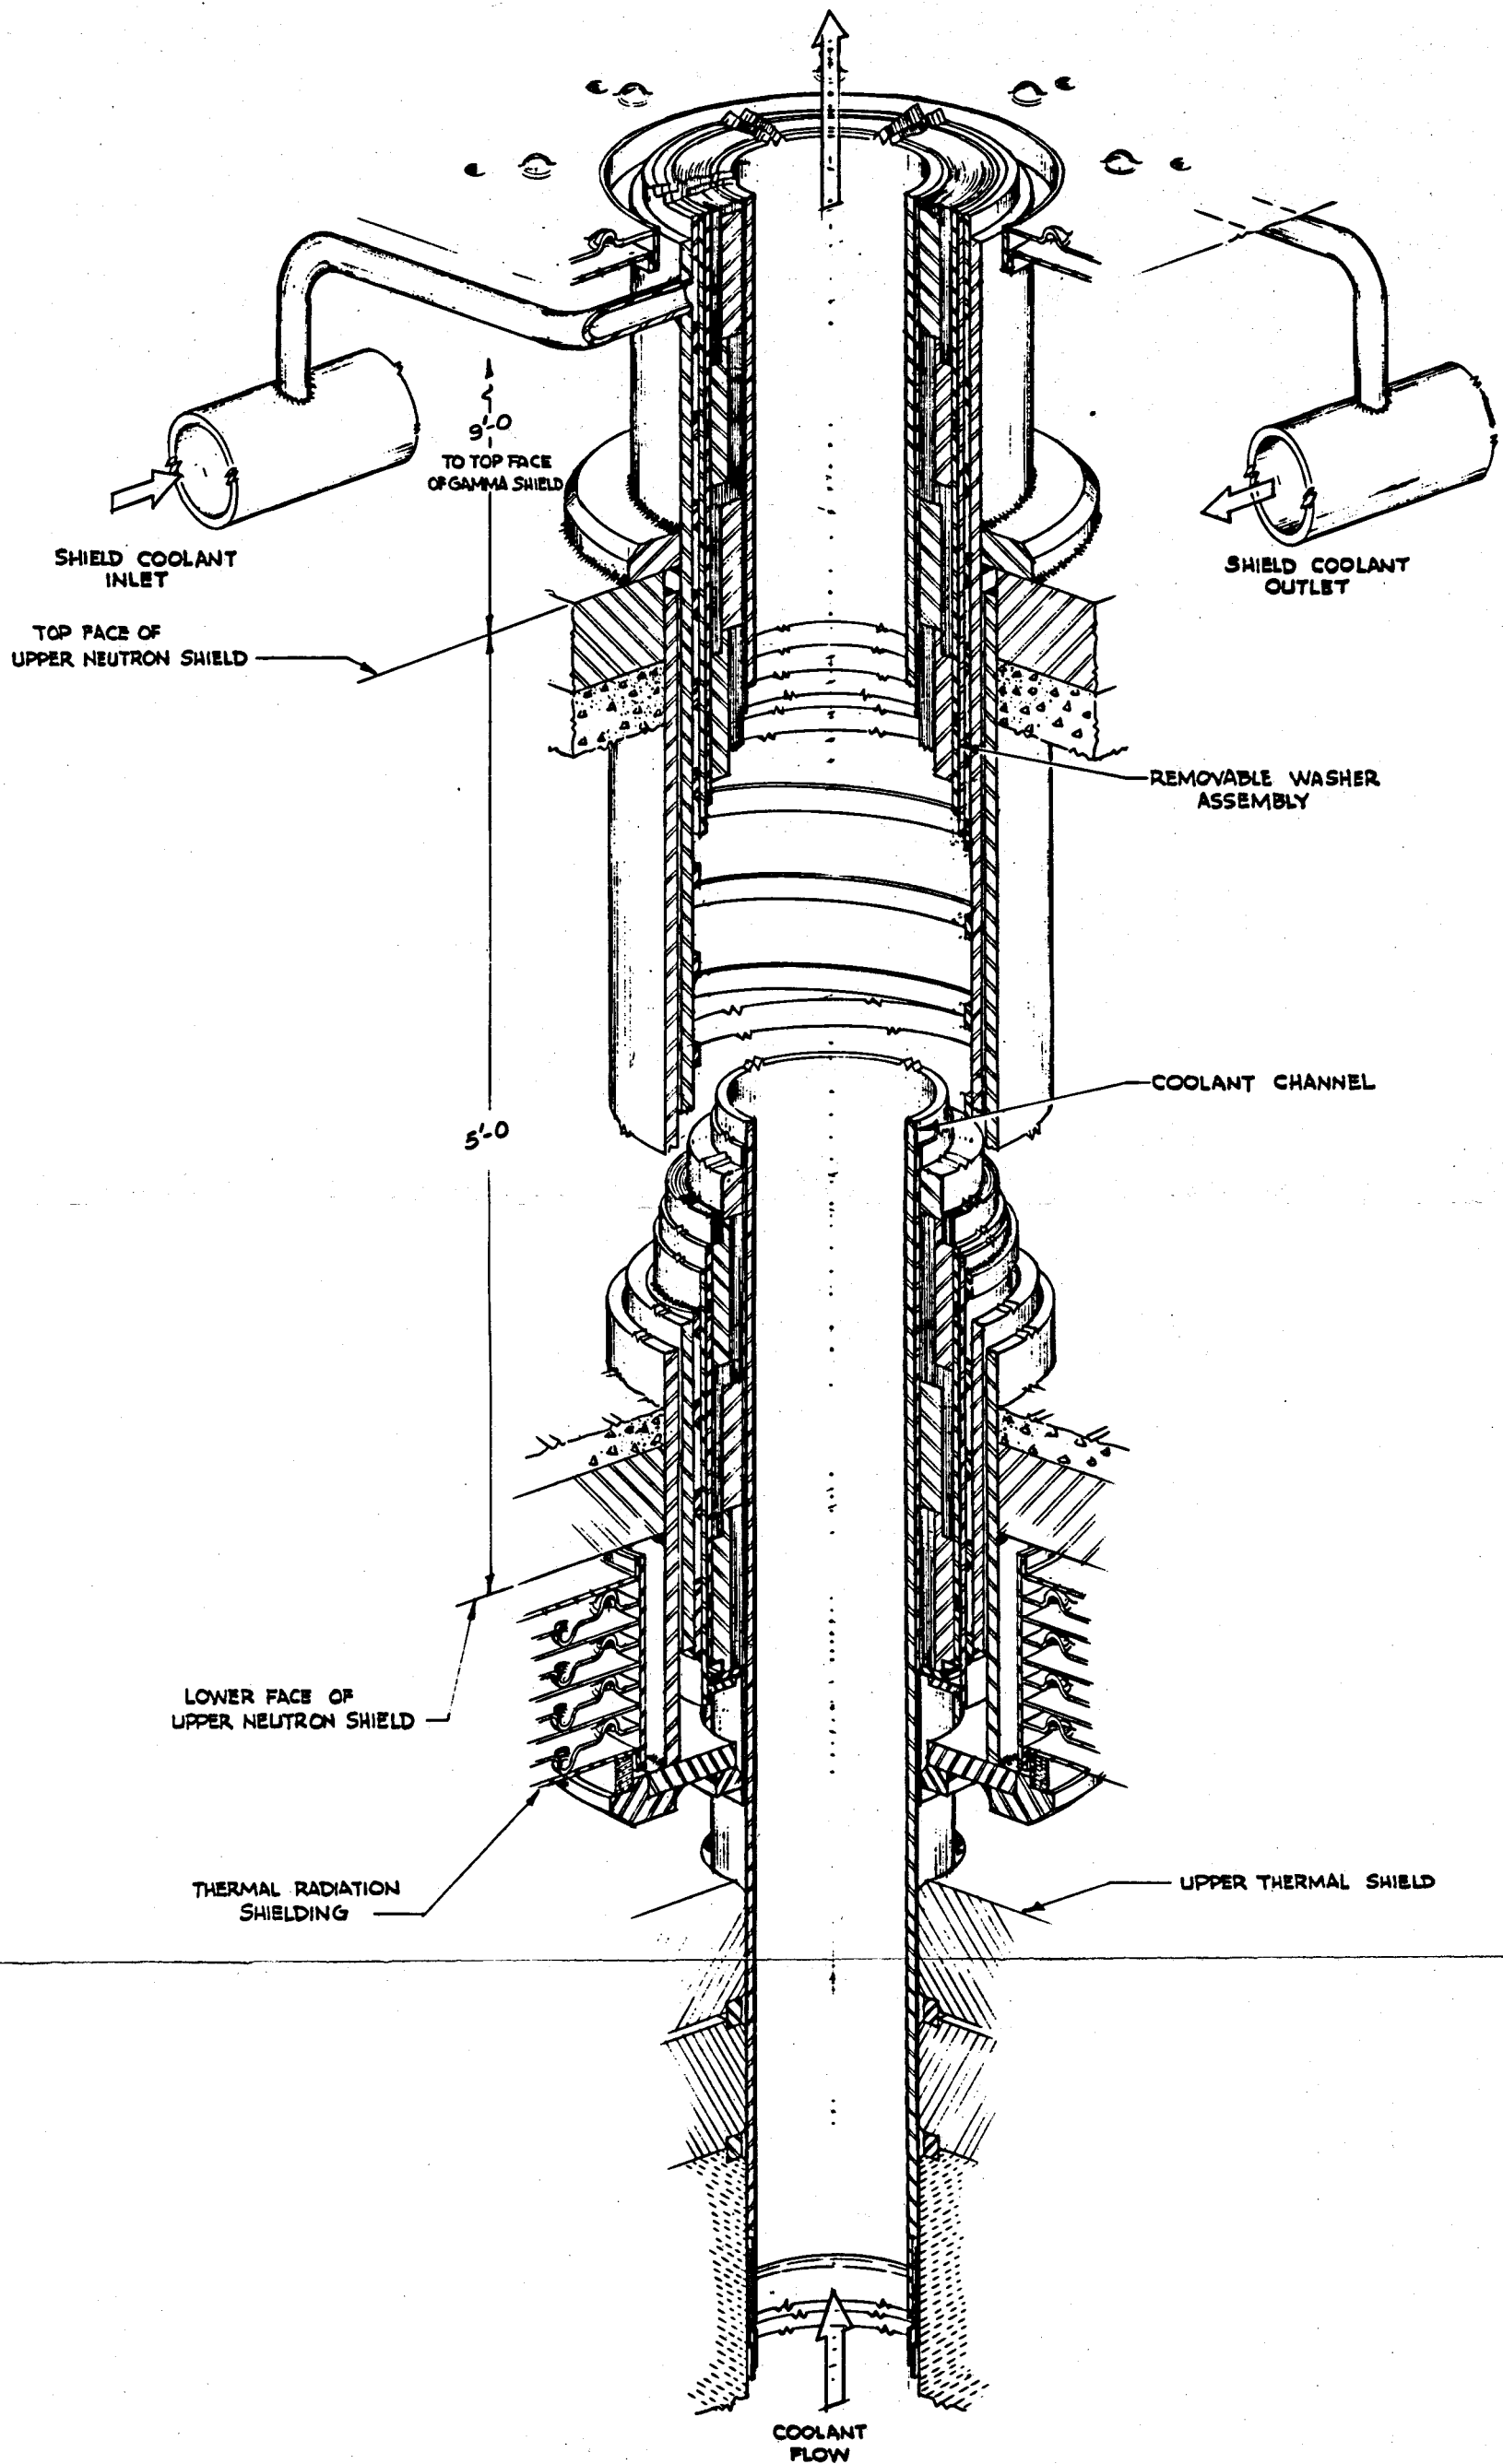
Coolant Channel Perspective Section thru Neutron Shield
